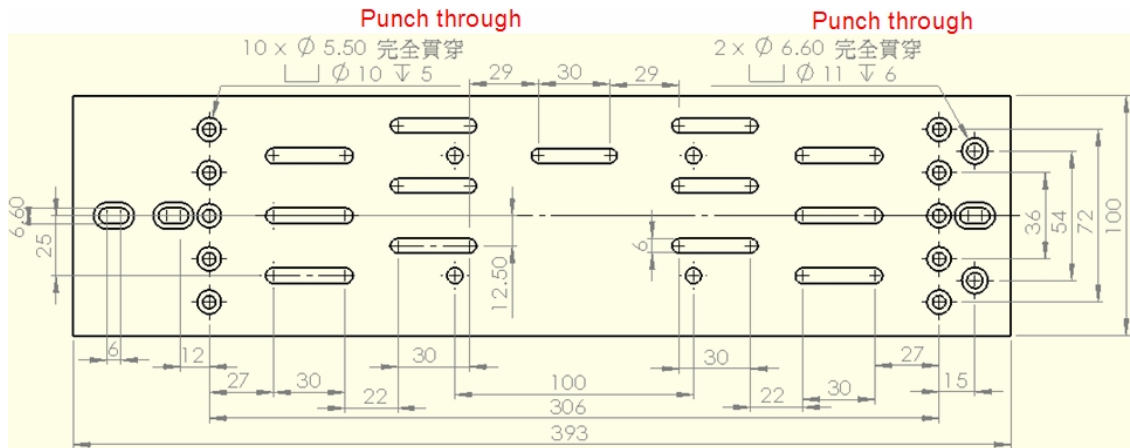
Engineering drawing of the bottom plate in Fig 92.
